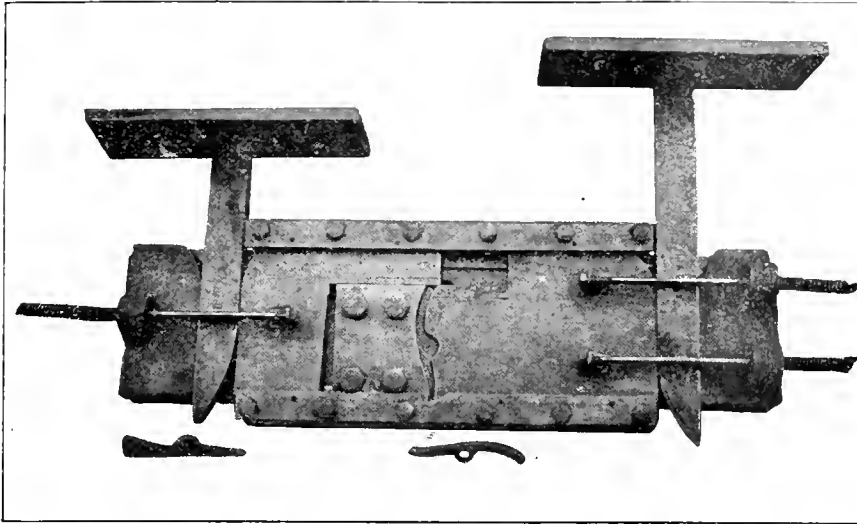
DEVICE FOR BENDING AND PUNCHING STEEL RATCHET PAWLS.
